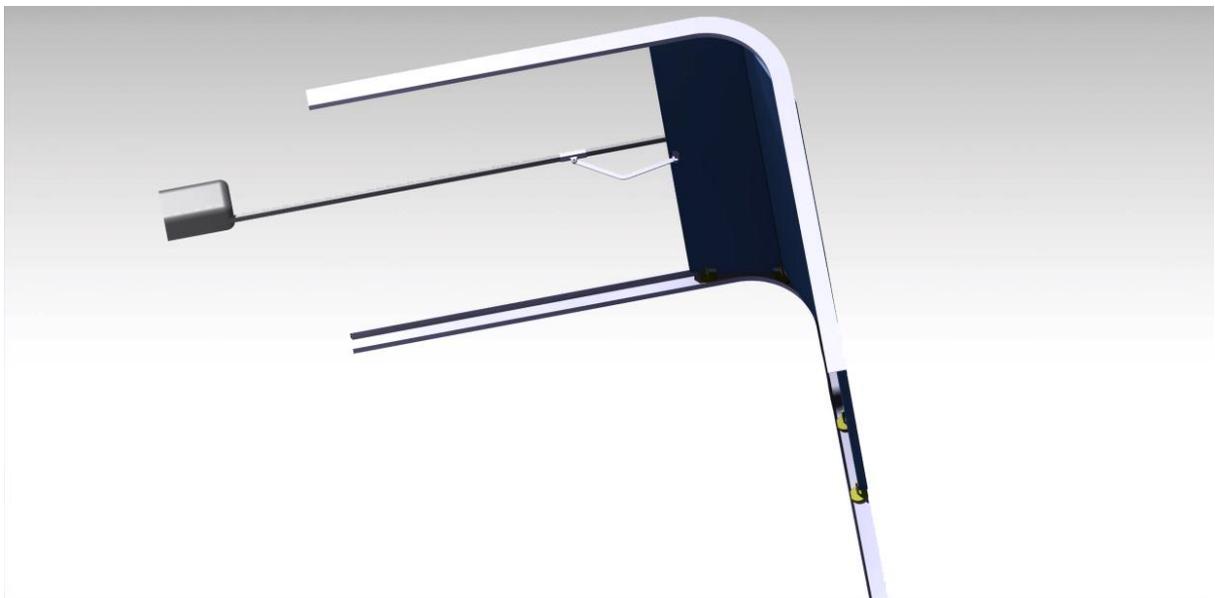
Image shows a rendered model in catia of assembled sectional garage door.
